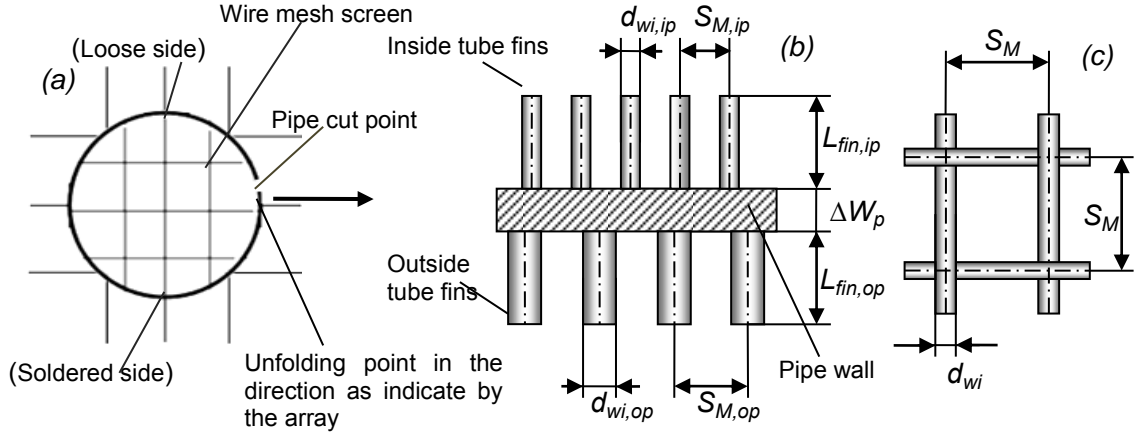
Wire mesh in a pipe; (a) loose and soldered sides representations, (b), Inner and outer pipe fins dimensions, (c) mesh dimensions
